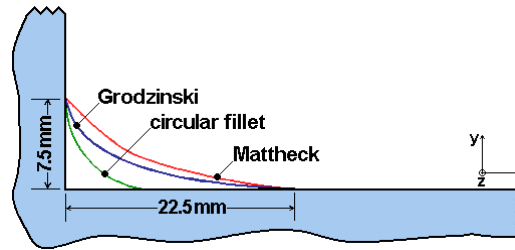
Geometrical profiles for constant radius, Mattheck, and Grodzinski fillets.
